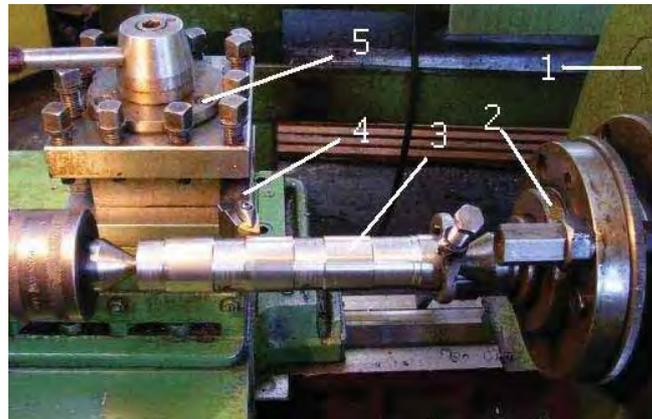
The view of working assembly (machine tool, fixture, object, tool): 1 - TUC 40 lathe, 2 - catch plate, 3 - machined object, 4 - turning tool, 5 - tool post
